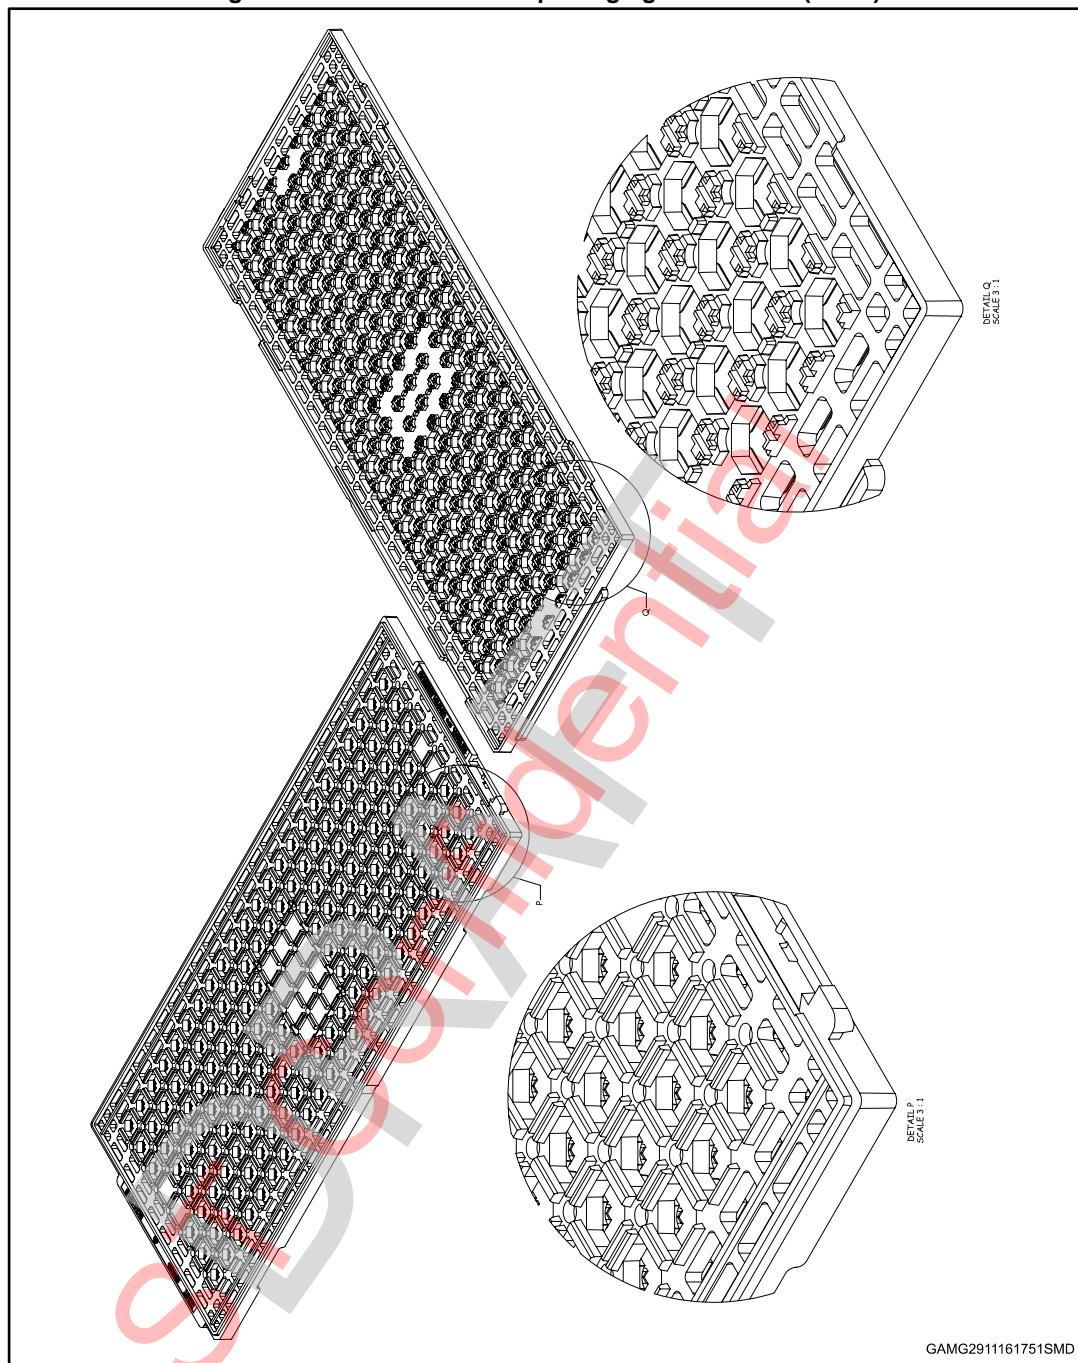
LFBGA 10x10x1.4 packaging dimensions (2 of 3)
